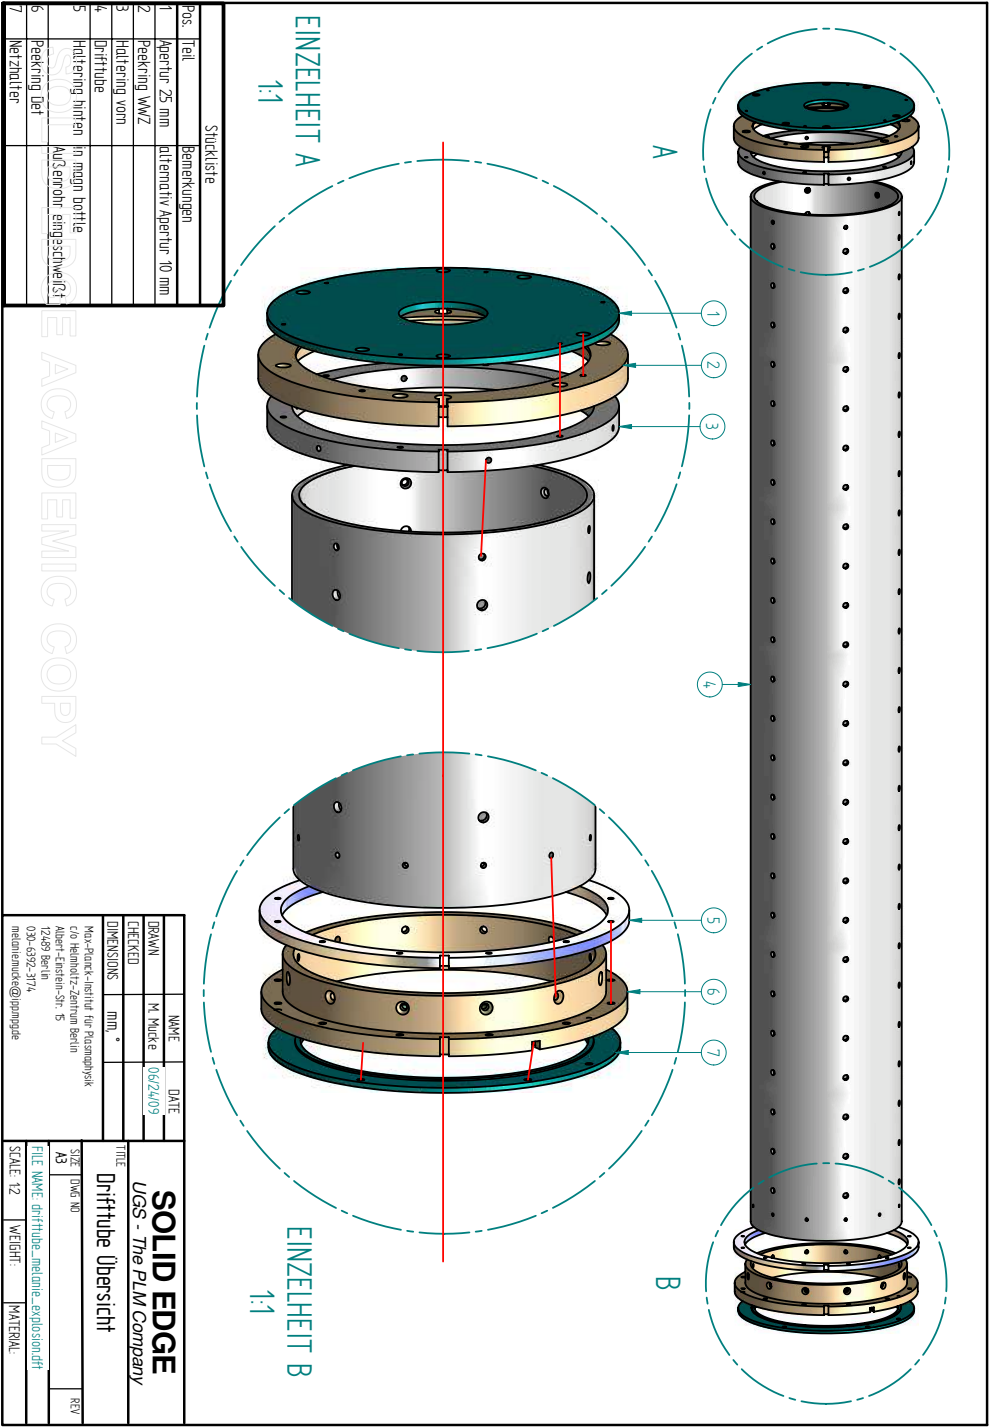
Inner parts of the magnetic bottle spectrometer in an exploded view.
